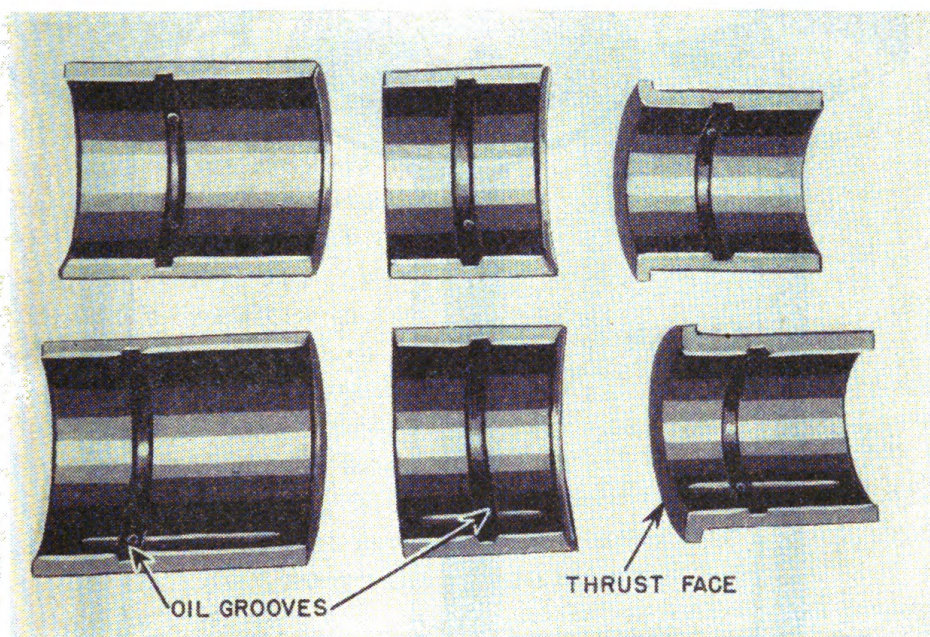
Types of grooving in connecting-rod bearings for use with force-feed lubricating systems.
